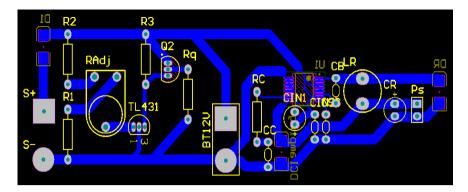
PCB design of solar power regulator to battery and 3.3V regulator
